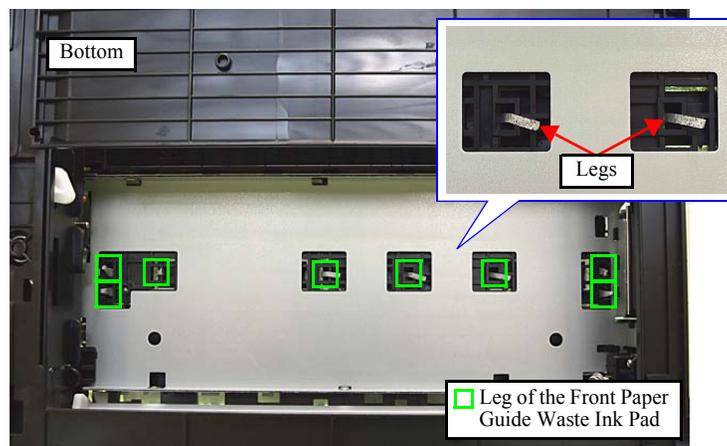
Installing the Front Paper Guide Waste Ink Pad
